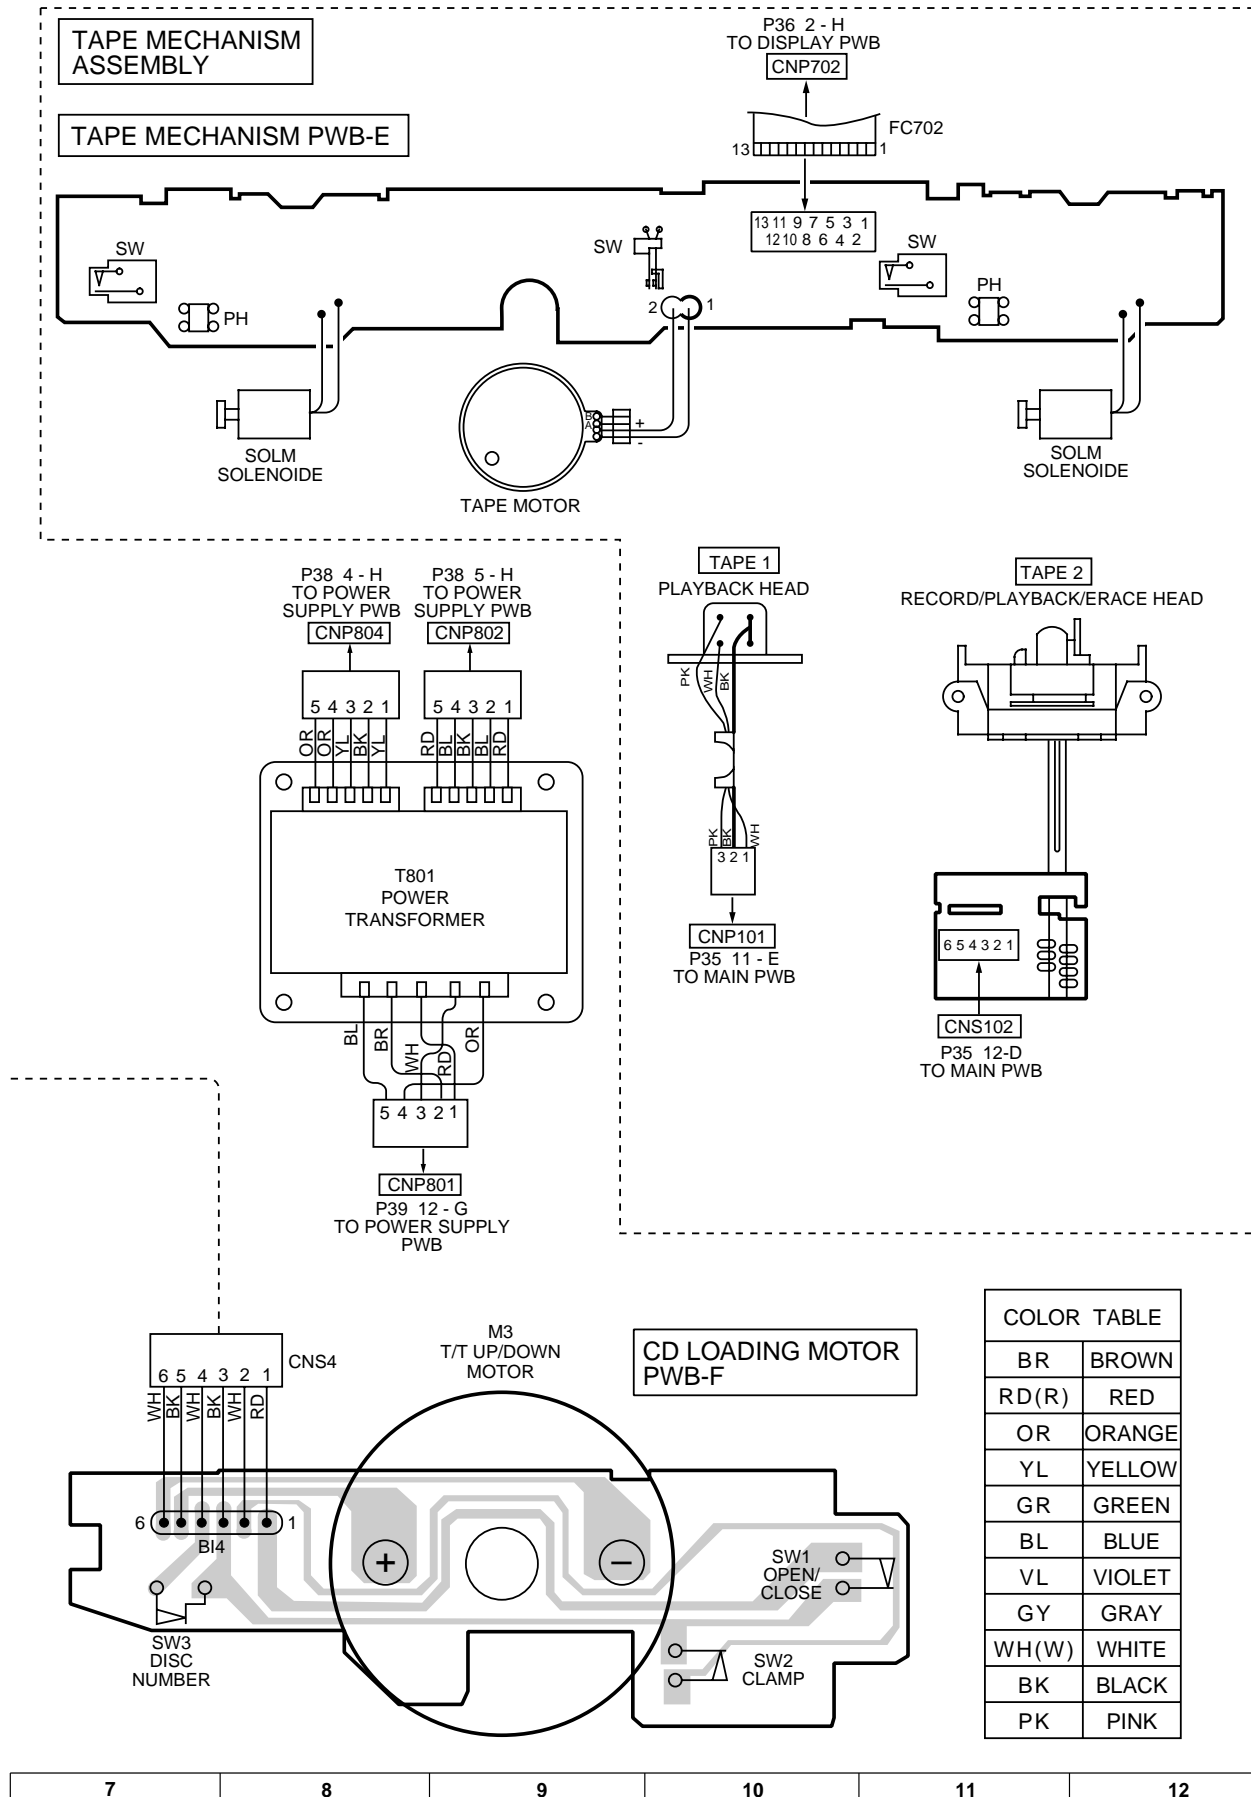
WIRING SIDE OF P.W.BOARD (8/9)
